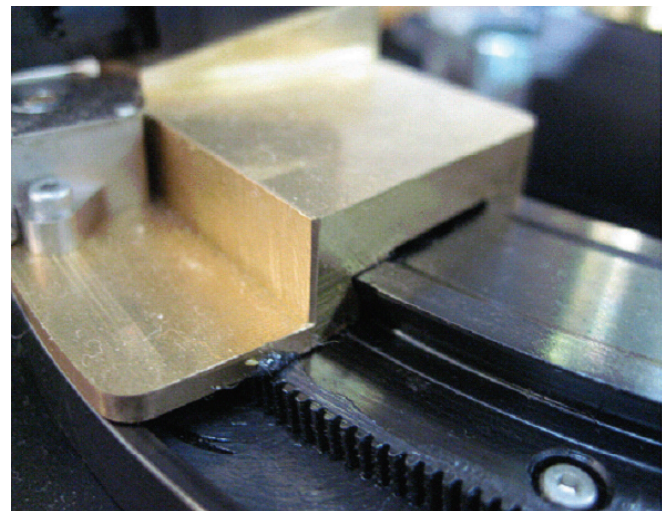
the arc guide and slider by cutting fabricated by cutting.
